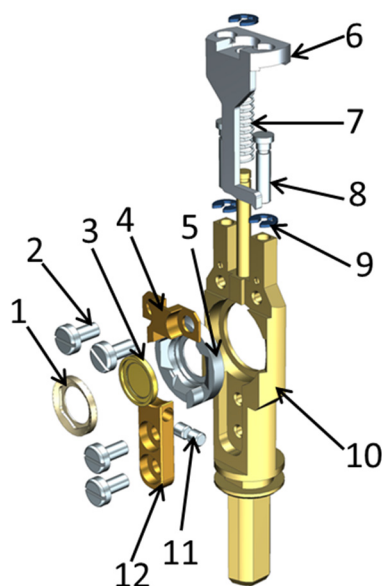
(1) AutoGrid holder, (2) Screw M1x2, (3) AutoGrid, (4) Bushing retainer, (5) Rotating bushing, (6) Holder handle, (7) Spring, (8) Rod, (9) C-clip, (10) Holder base, (11) Magnet, (12) Bushing holder.
